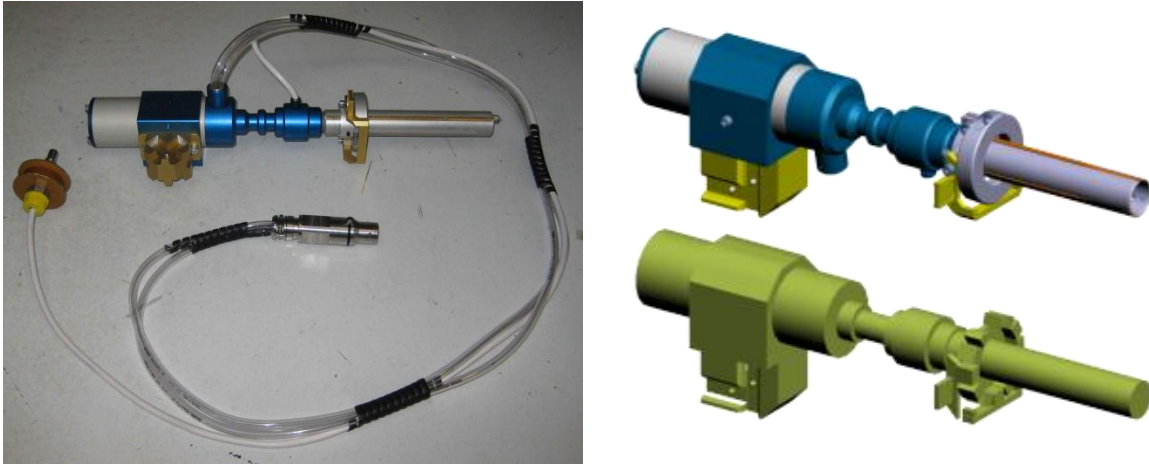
Left hardware mock-up of the welding tool. Upper right: the CAT model of the welding tool. Lower right: PhysX model of the welding tool.
